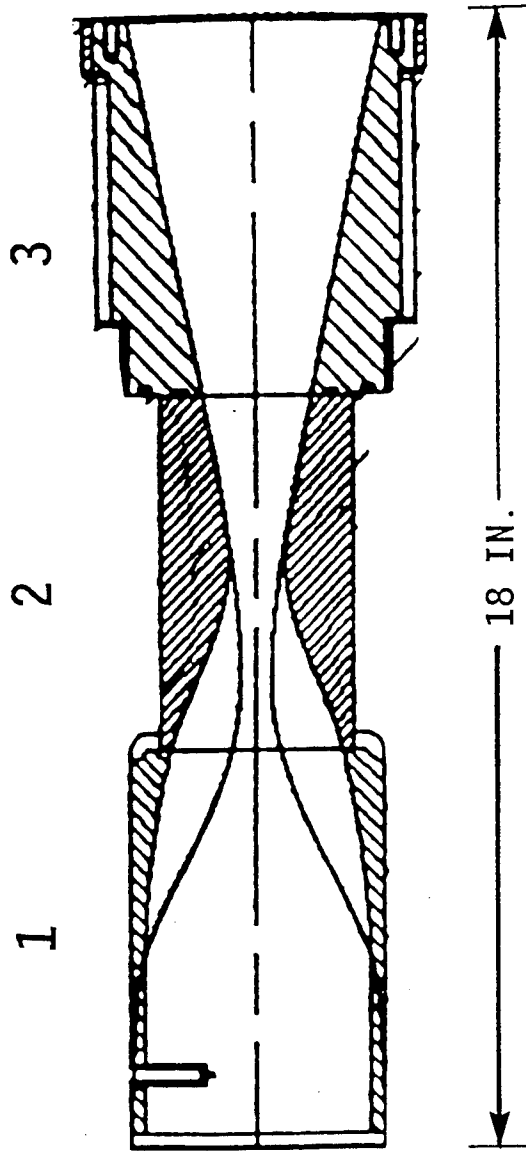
MACH 14 NOZZLE THROAT SECTION WITH MACH 18 INSERT
